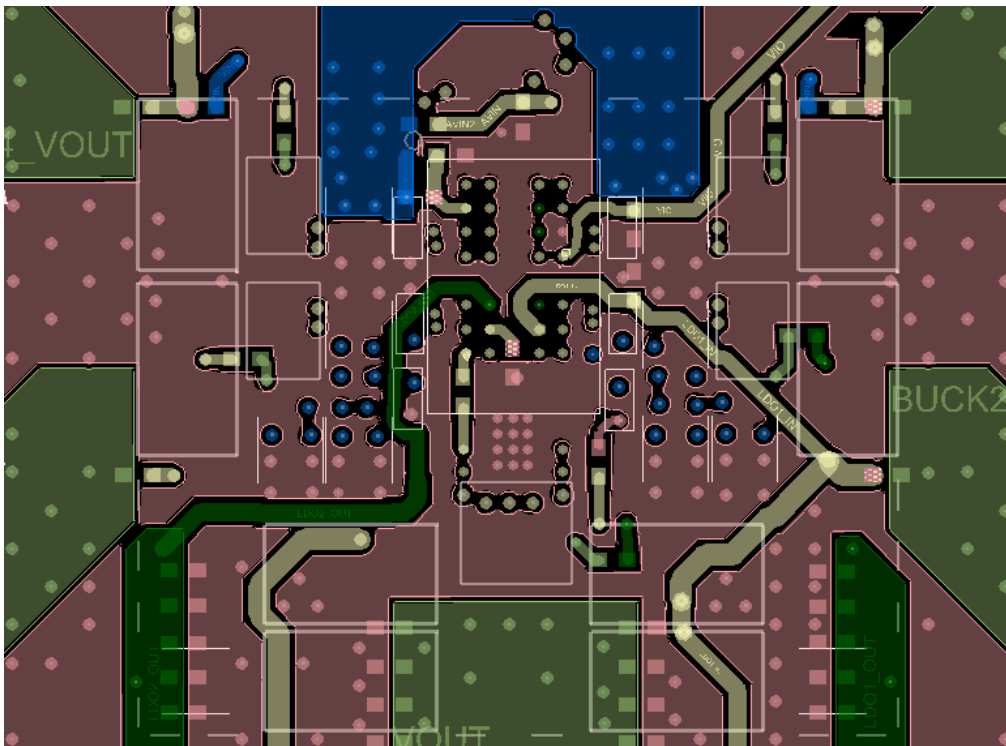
PCB Bottom Layer and Bootstrap Capacitor Connection
